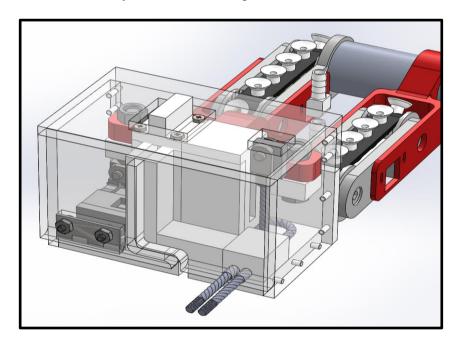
Isometric View of Sensor Deployment Mechanism Assembly
